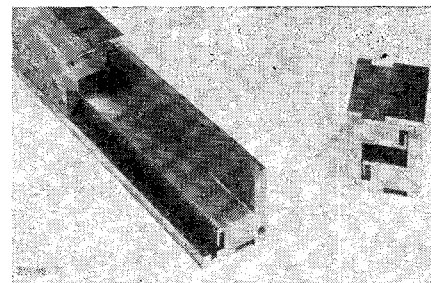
Experimental test sections of serrated choke machined from aluminum castings.
